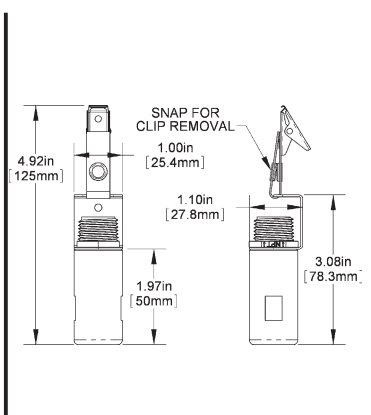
Hanging Bracket, 1" Buffer w/Plastic Threaded Fitting
